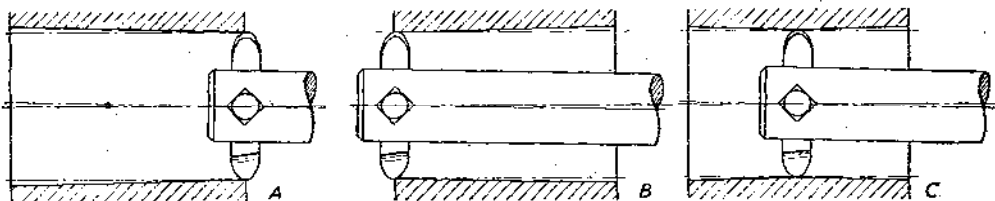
Action of fixed double-edged boring cutter, when traversed on a line not truly parallel to work axis. Cutter centred, (A) at front of hole ; (B) at rear end of hole ; (C) midway through hole .
